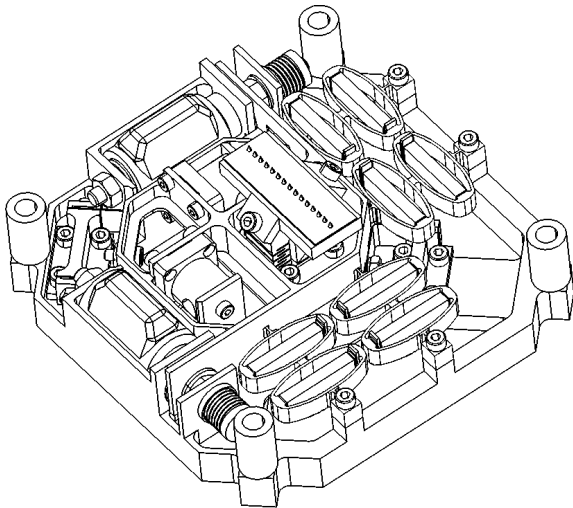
View of the final stage including the latch mechanism in the locked configuration.
